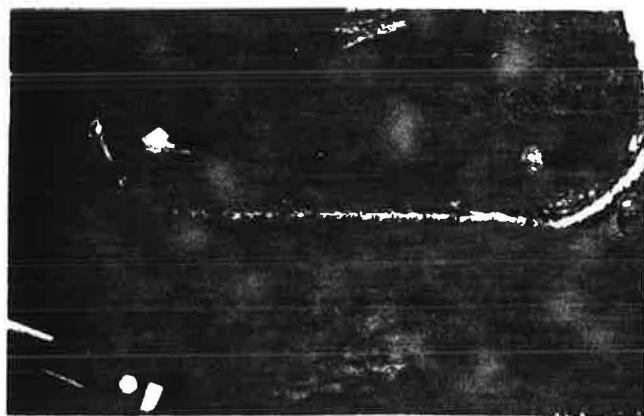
Transverse fillet weld after gas tungsten arc remelt
